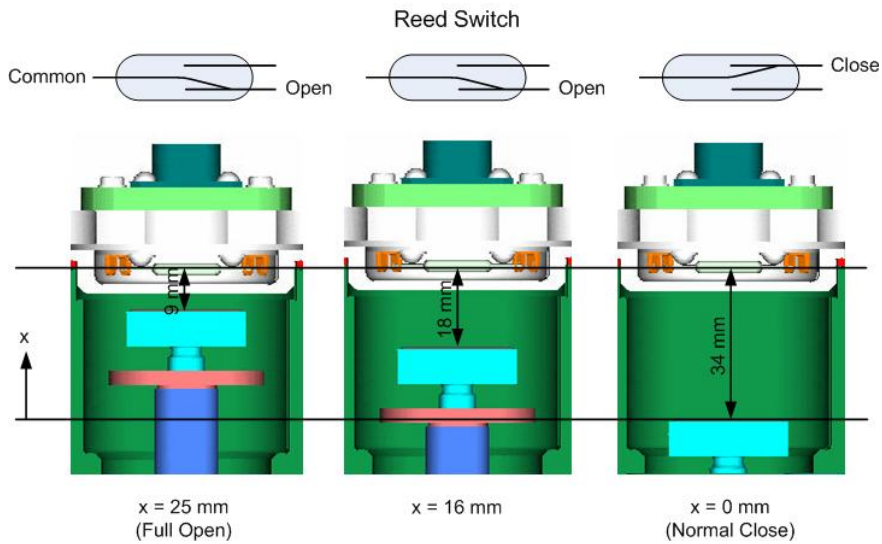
Test Result of Position Indicator at Valve Closing Event
